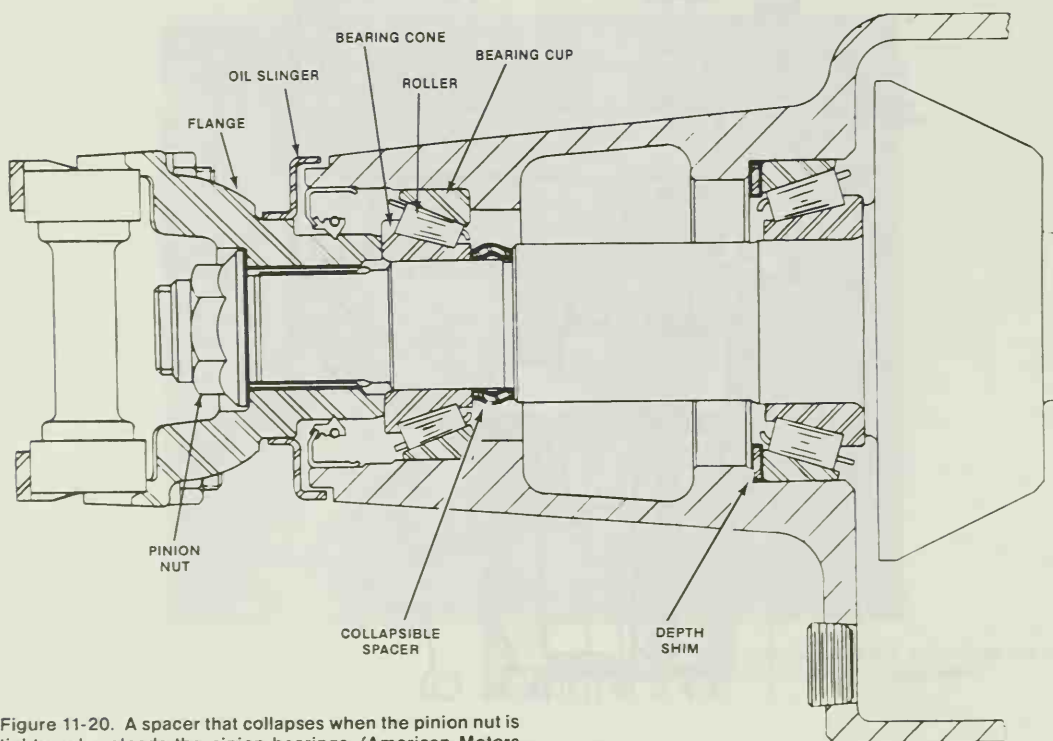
A spacer that collapses when the pinion nut is tightened preloads the pinion bearings. (American Motors Corporation)
